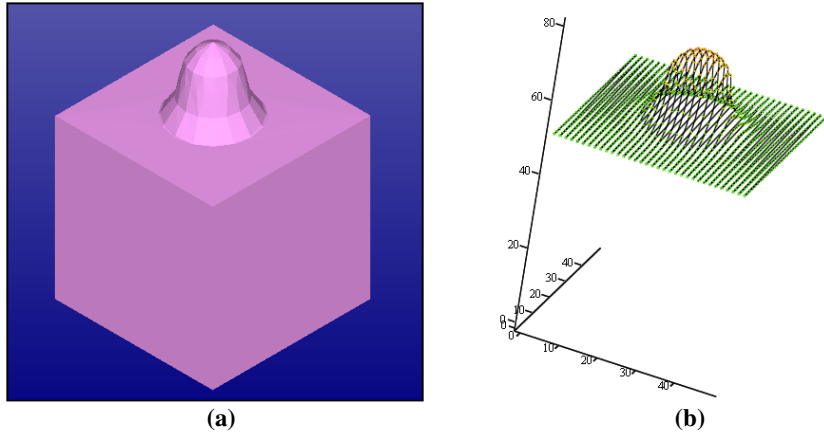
(a) offset surface with .7395mm radius (b) finish tool path
